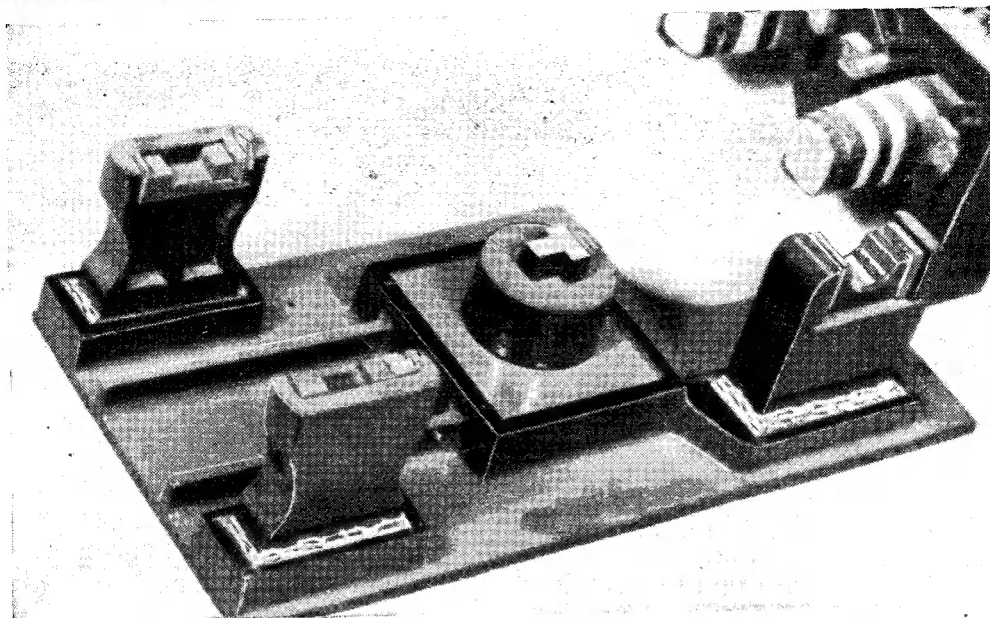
Bearings and anvil of the nose-helve hammer, and main bearing for camshaft
